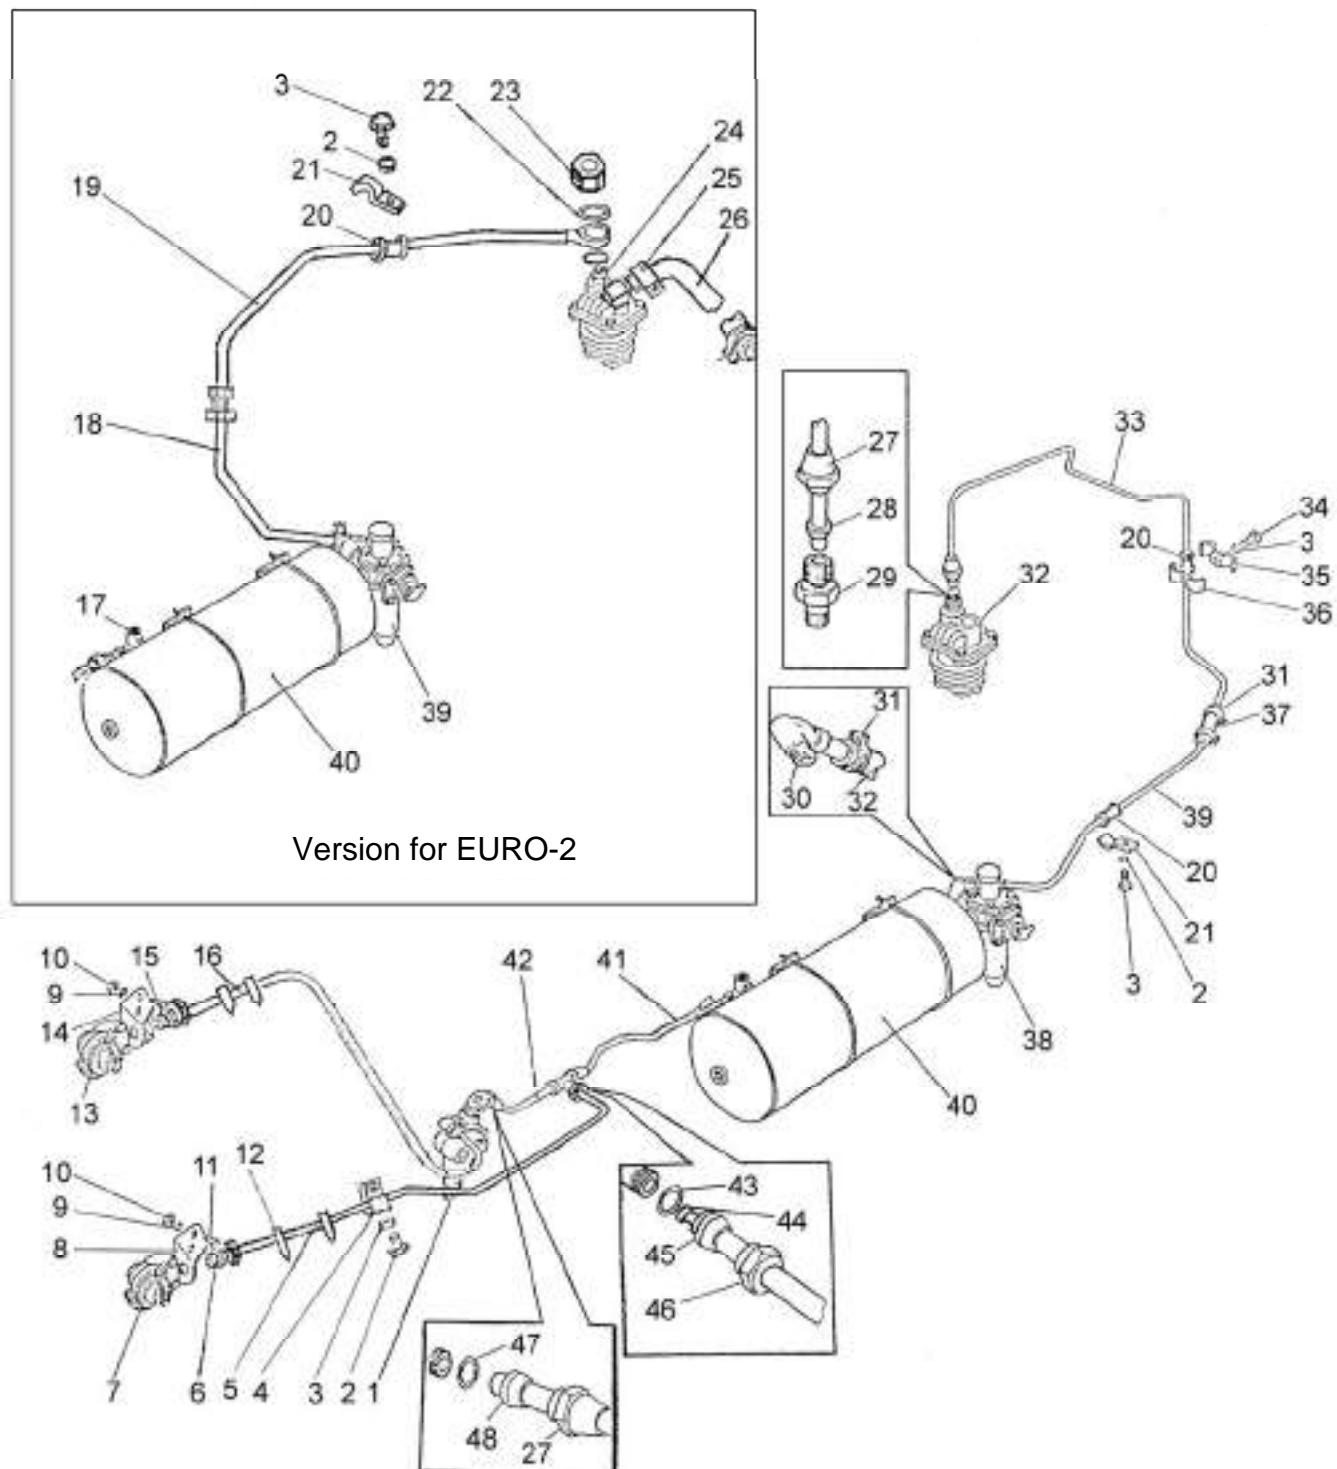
Pipelines and fittings of the two-line pneumatic actuator of the trailer brakes
